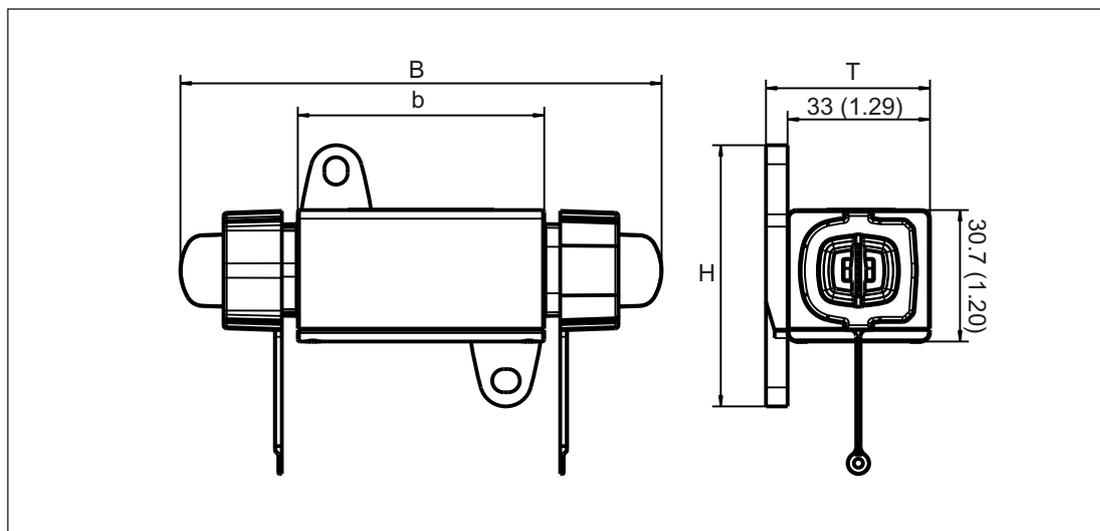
Dimension drawing, DRIVE-CLiQ coupling
